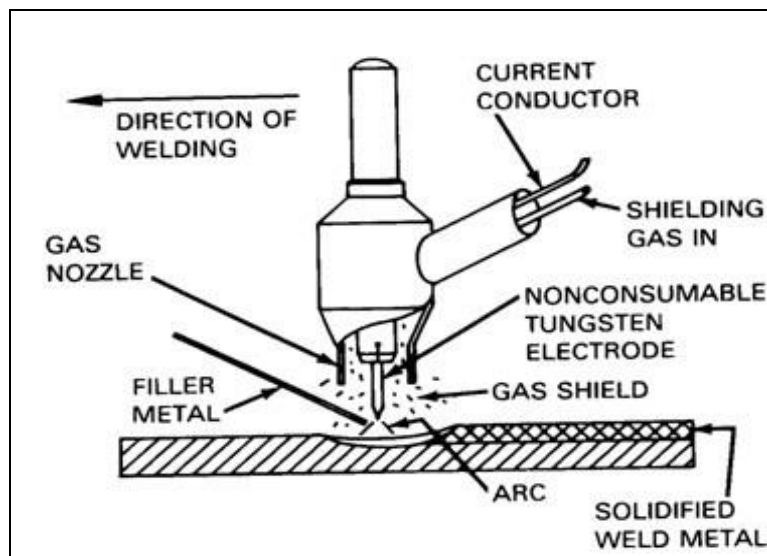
Tungsten Inert Gas or GTAW Welding Process [2].
